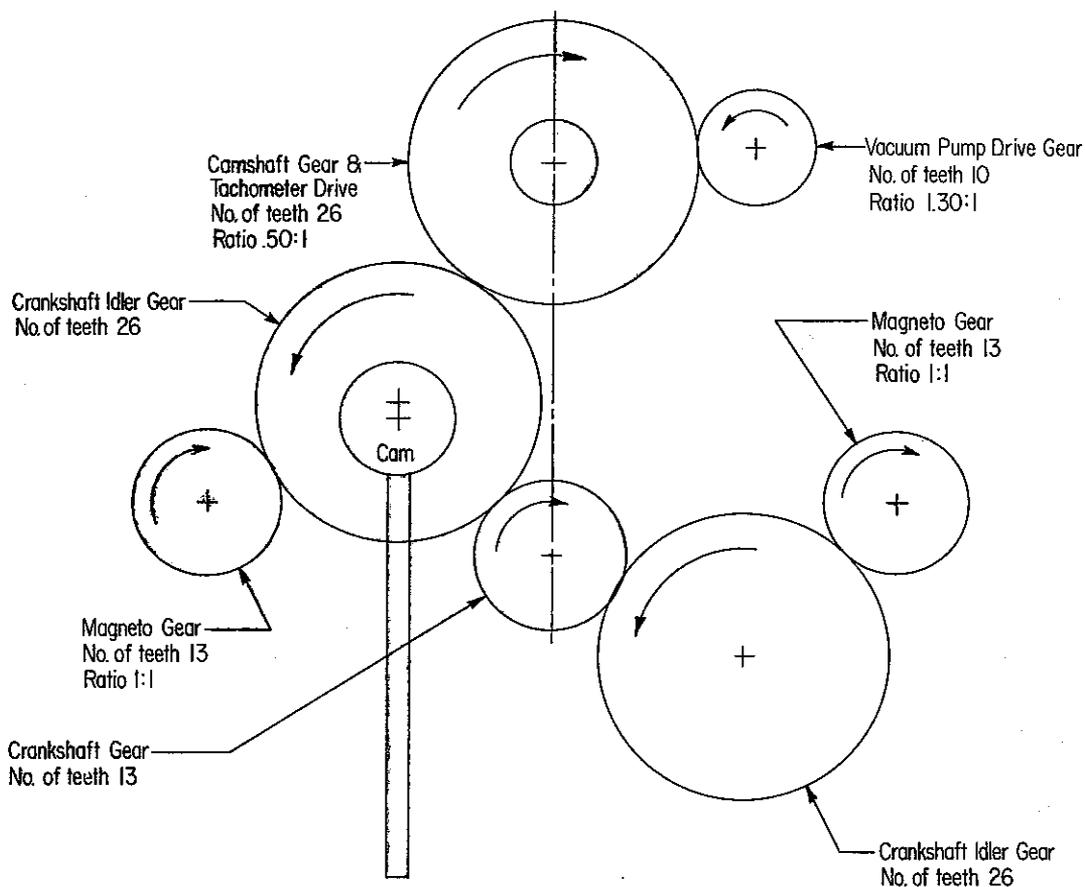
Gear Train Diagram - O-235, O-290-D and O-290-D2 Series
